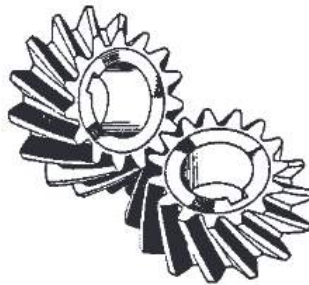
Spiral bevel gear. Figure courtesy of *Martin Sprocket* [39].
